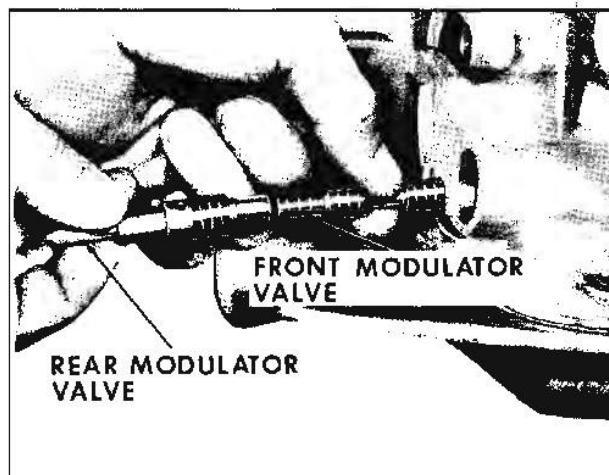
B-38 Removing Vacuum Modulator Valve Assembly
